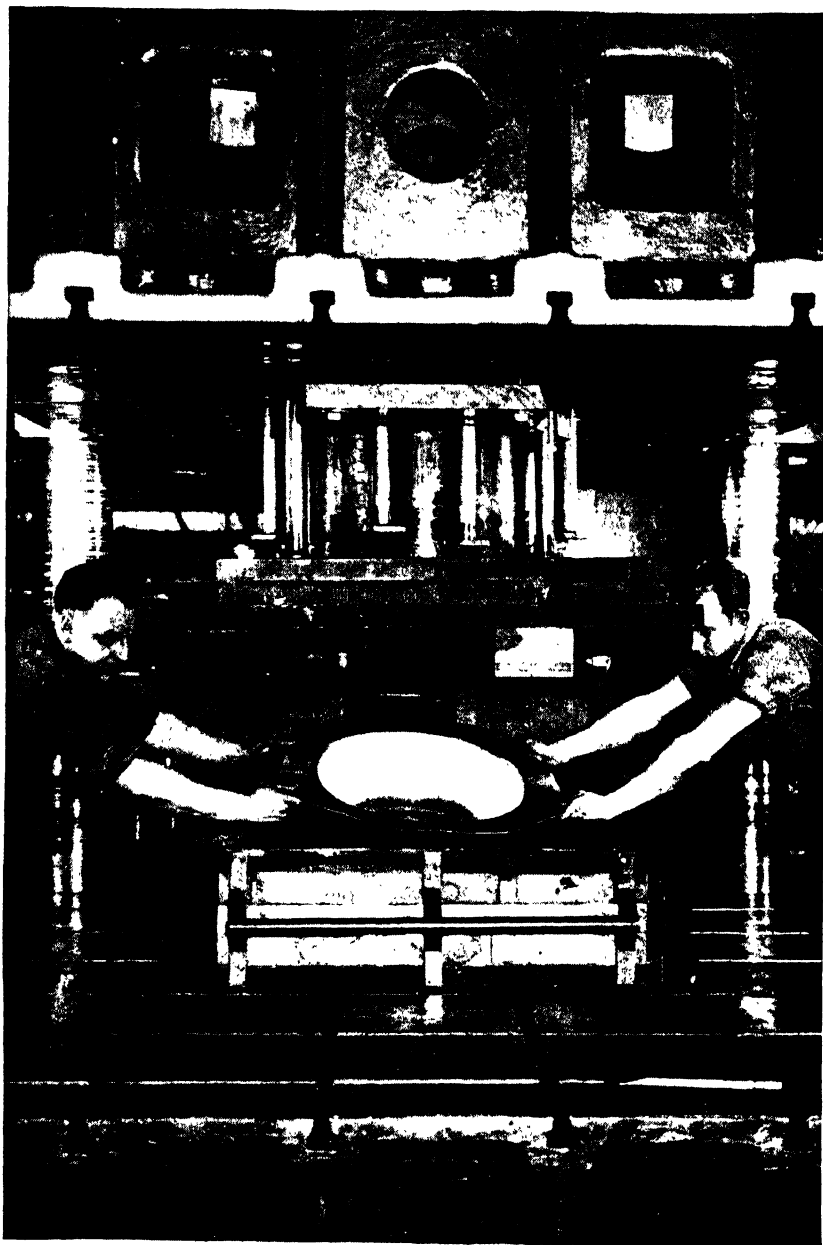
PLATE III.—A drawing die of Masonite construction. Removing a large drawn shell from a conventional drawing die used in a hydraulic press at the Grumman Aircraft Engineering Corporation's plant, Bethpage, N. Y. The shell is designed for a landing-gear wheel pocket, and its flange is to be subsequently trimmed for attaching the shell in an aircraft assembly.
